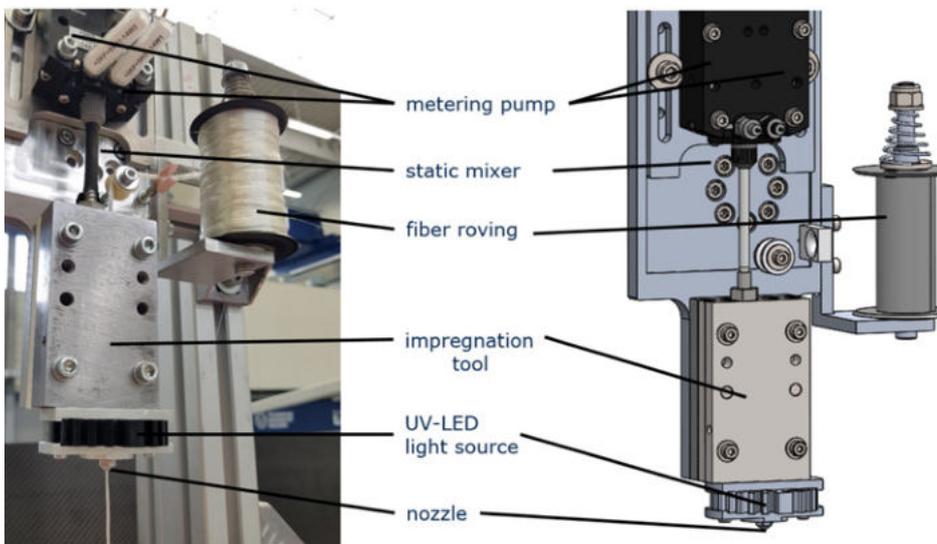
Print head for 3D printing of continuous fiber-reinforced polymers with its basic components (left), detailed view of CAD-model of the print head (right)
